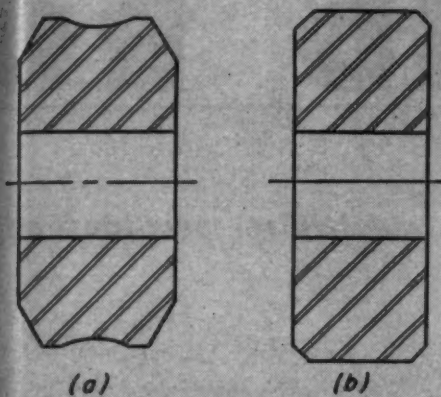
Worm-gear blank. Throated blank is shown at *a* and nonthroated blank at *b
